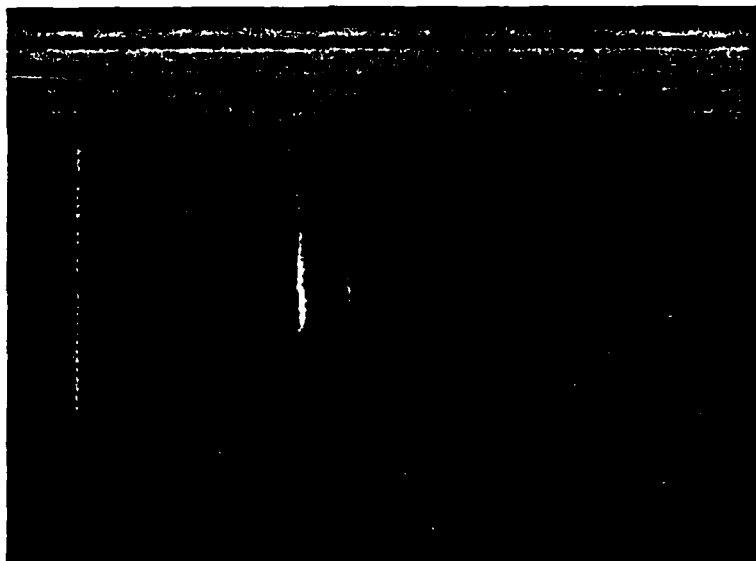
Pitch/catch image of the 10 mm wide fatigue crack.
